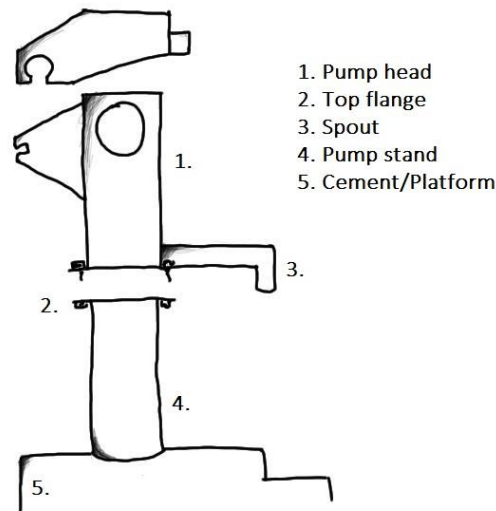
Pump parts, Standard Afridev names. Picture: Elin Olsson
